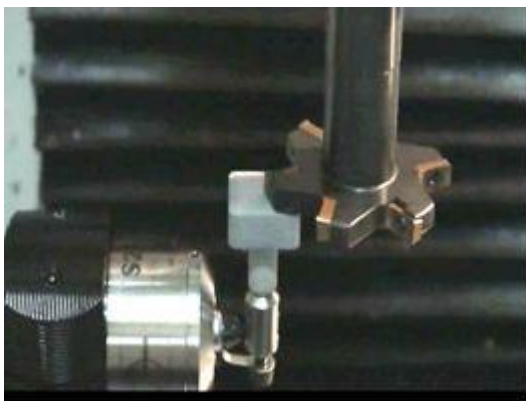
Mill no. 2 measurement using the TS27R instrument
